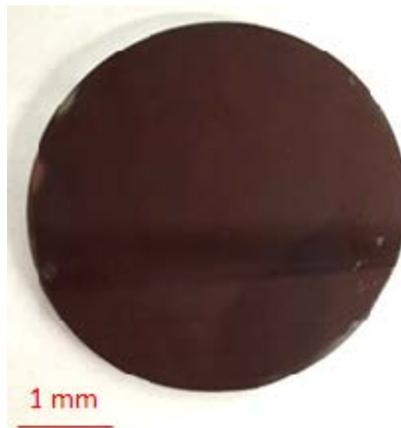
Cross-sectional optical image of a H13 steel sample from a die head after EDM.
